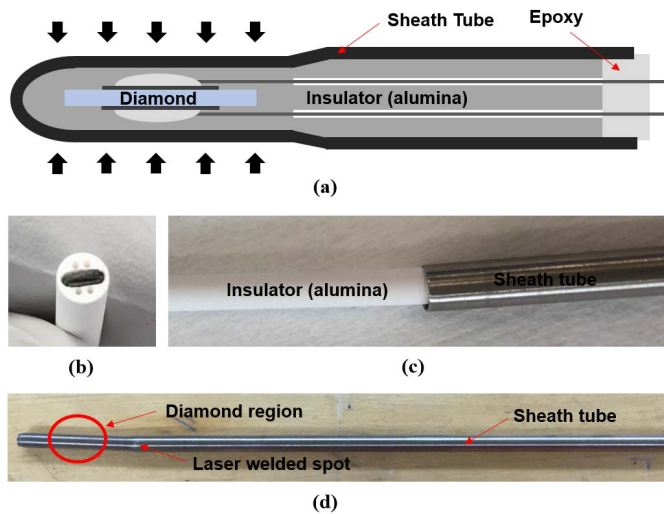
Fabrication process of the diamond thermistor with sheath tube design. (a) Schematic of sheath tube design. (b) Diamond inserted in the CAR. (c) Inserting CAR into Sheath tube. (d) Complete diamond thermistor with the sheath tube.
